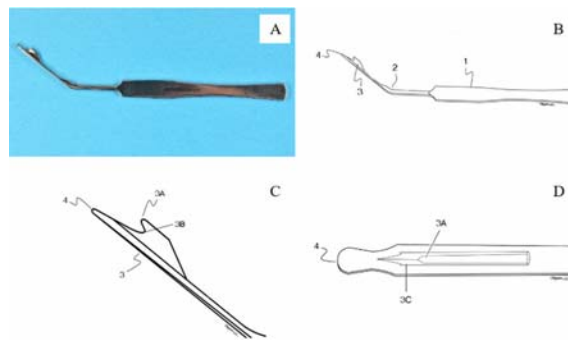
A) Newly designed instrument B) Shape and parts of instrument: holding piece (1), angular connecting piece (2), blade (3), and tip (4). C) Cutting part with covered head (3A) and vertical sharp cutting part (3B). D) Expanded wide base (3C).
